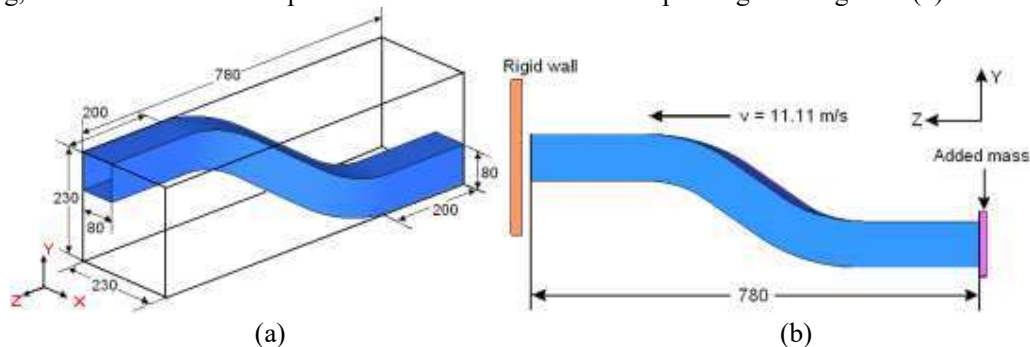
(a) S-shape tube (the unit of measure is mm), (b) loading condition.
